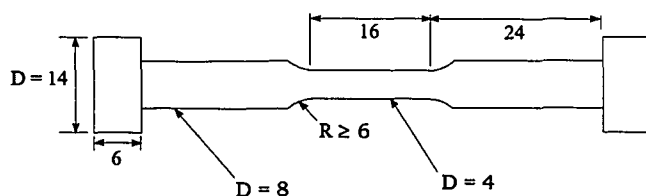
Tensile specimen configuration, dimensions in mm.
